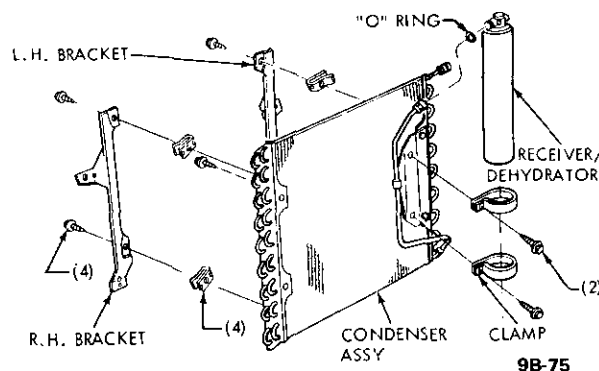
B-101 Receiver - Dehydrator. Condenser Attaching Screws and Brackets - GT
